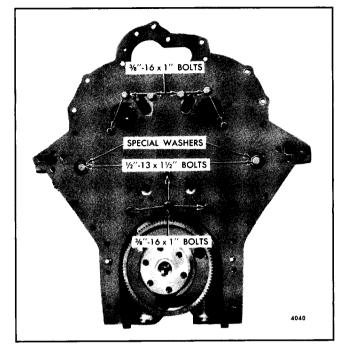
Cylinder Block Rear End Plate Mounting (V-Type Engine)
